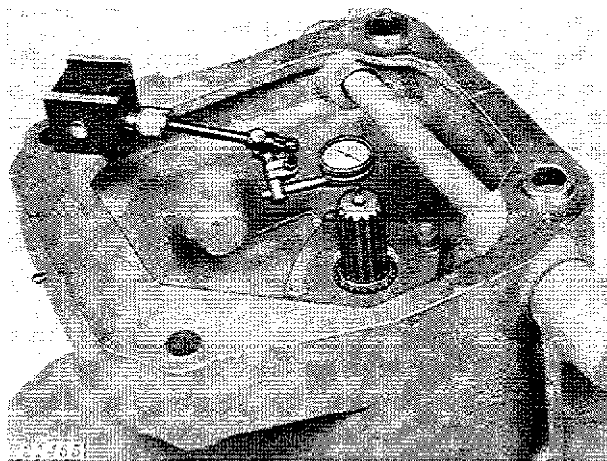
Checking for Proper Endplay on Clutch Shaft
